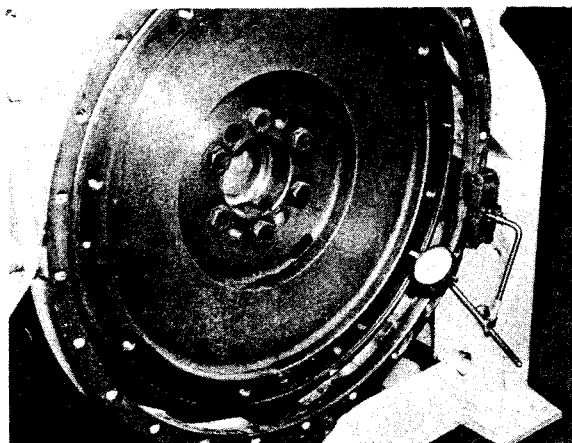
CHECKING ENGINE FLYWHEEL RUNOUT
